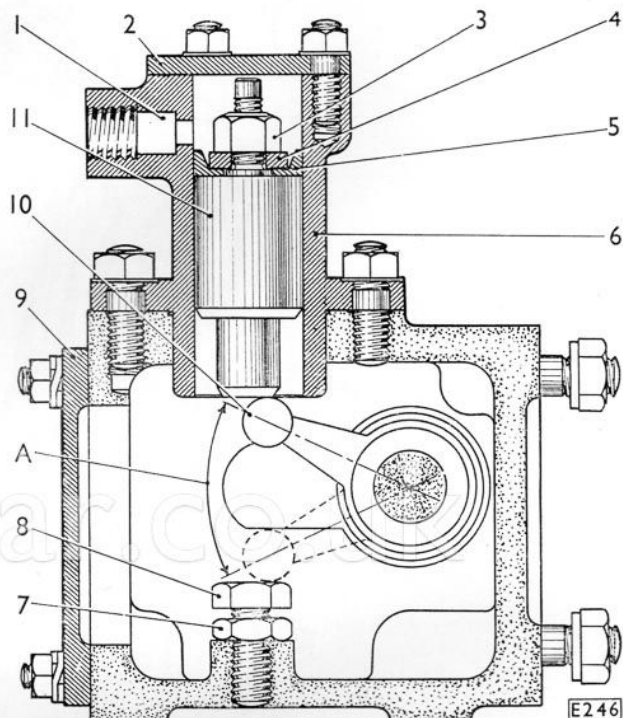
Section through throttle control motor showing travel of actuating lever at full throttle
